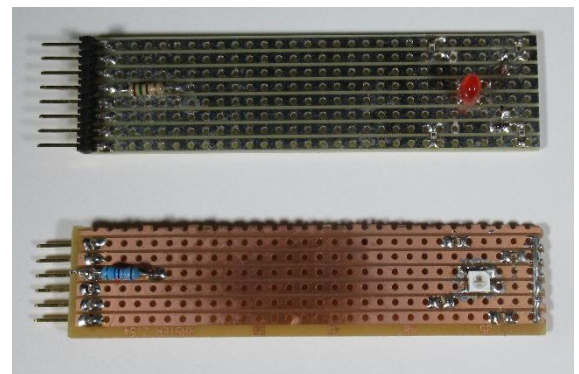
Board 1 (top) and board 2 & 3 (bottom)
